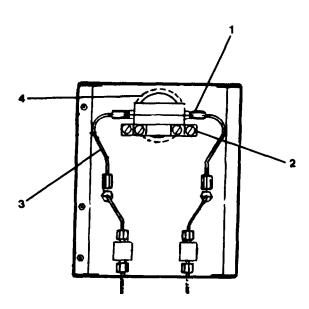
Diesel Fuel Oil Filter/Separator. Assembly.
